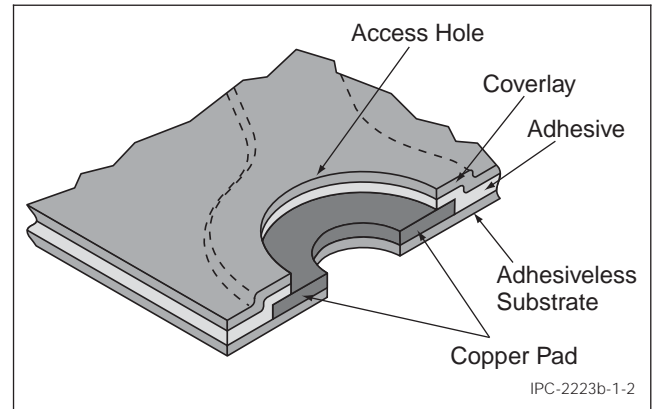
Type 1 Single Sided Flexible PB - Adhesiveless Substrate Construction
